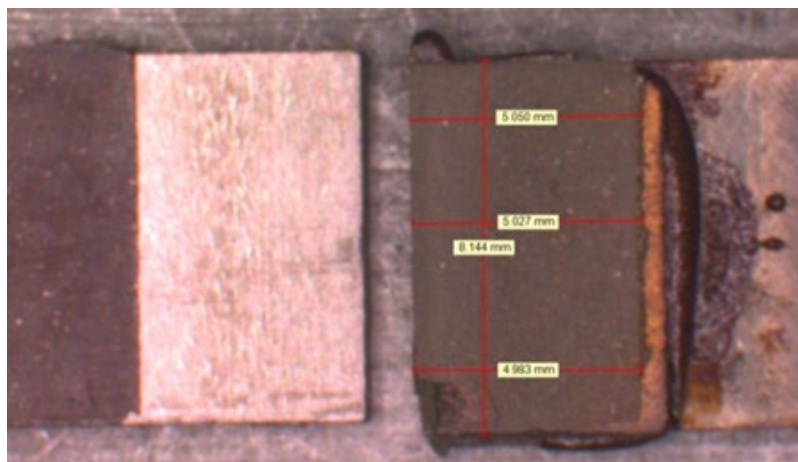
Micrograph of typical fracture surface of lap shear specimens showing overlap dimensions of adhesive bonding.
